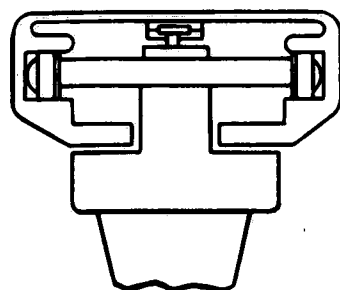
TRACK AND CARRIAGE ASSEMBLY.
